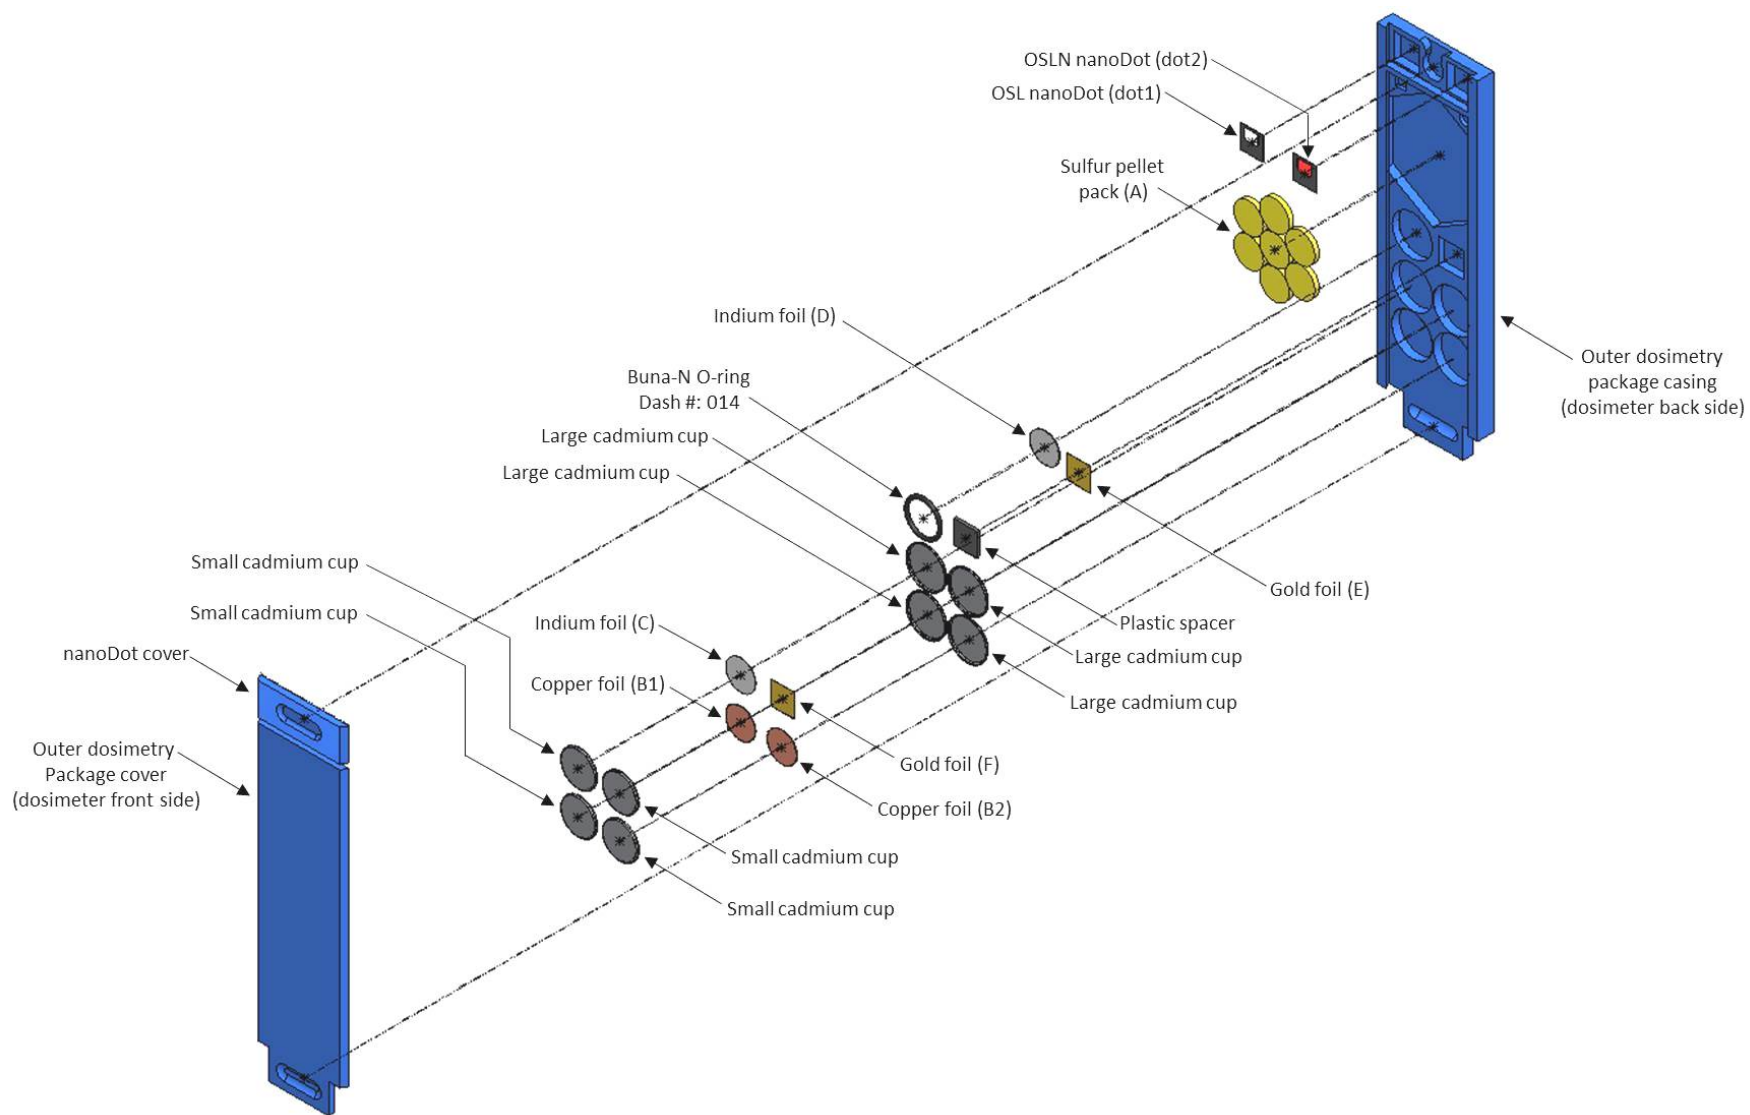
PNNL FNAD Outer Dosimetry Package (exploded view)
